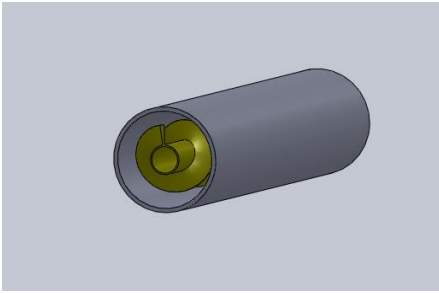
Enclosed isometric x-Sectional Sectional view
